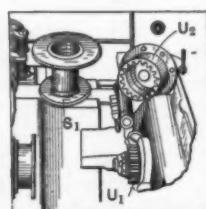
Nesting of the clutch yoke universal joint and relating members
